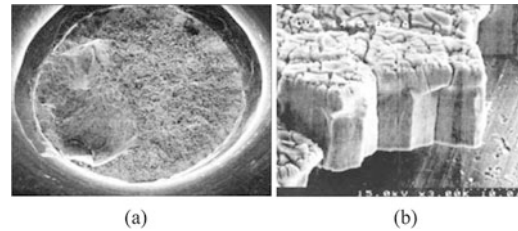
Hydrogen embrittlement. (Source: Fastener Engineering & Research Association report, 2007). (a) A Typical HE Failure of a Plated Bolt. (b) A Typical Columnar Structure on HE
